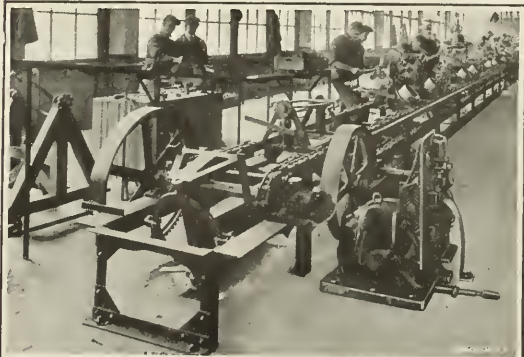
Formerly the Packard Motor Car Co. assembled clutch units on stands that were distributed over the floor of the clutch assembling department. The Palmer-Bee Co. suggested that the progressive method of assembly be employed in handling them, so a conveyor system was installed, which carries stands similar to those formerly employed
